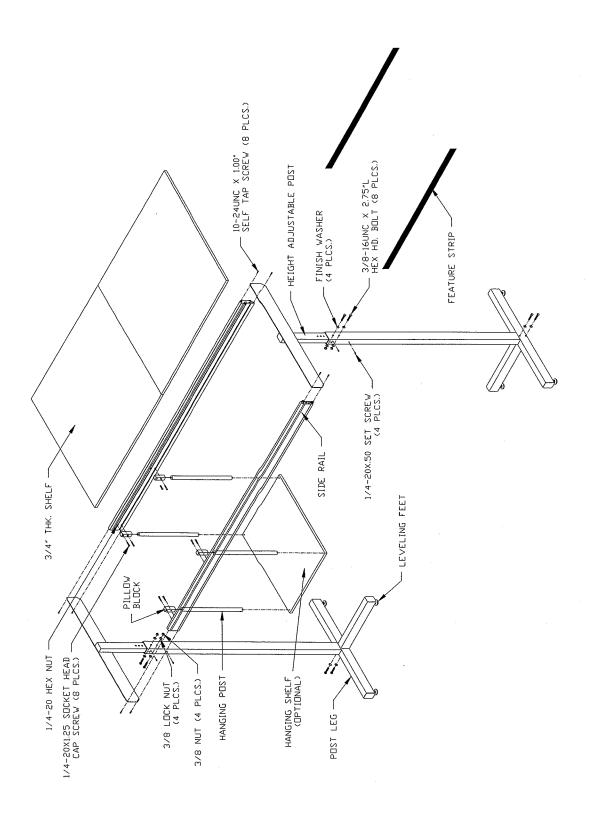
Assembly view of Over Head Monitor Shelf and Optional Hanging Shelf.
